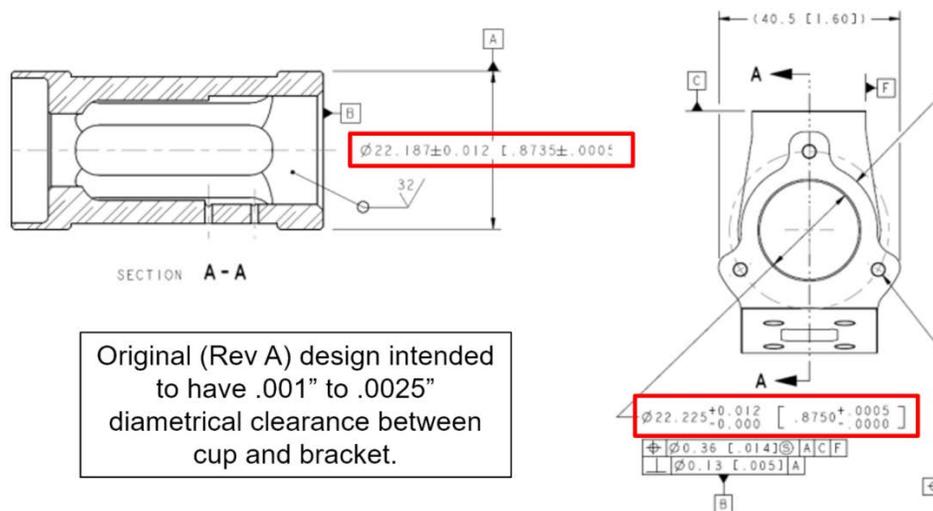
Snippets of original flight drawings of critical diameter dimensions and tolerances
